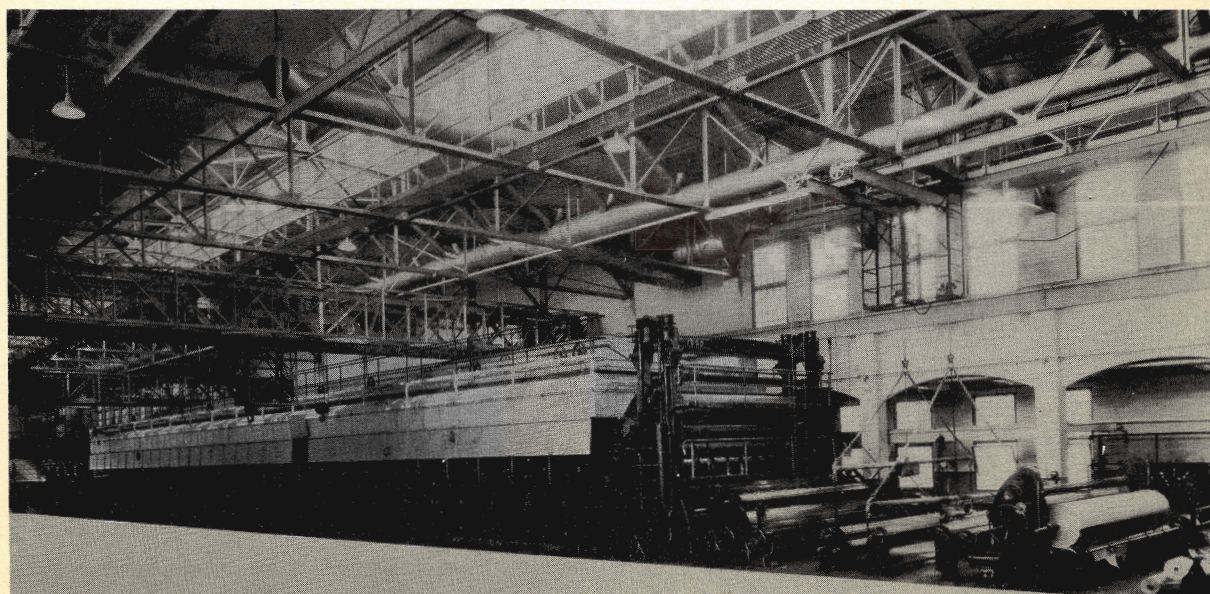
Wet End of 226-inch High-speed Newsprint Machine, showing Fourdrinier, Suction Couch Roll, and First and Second Press Rolls.
